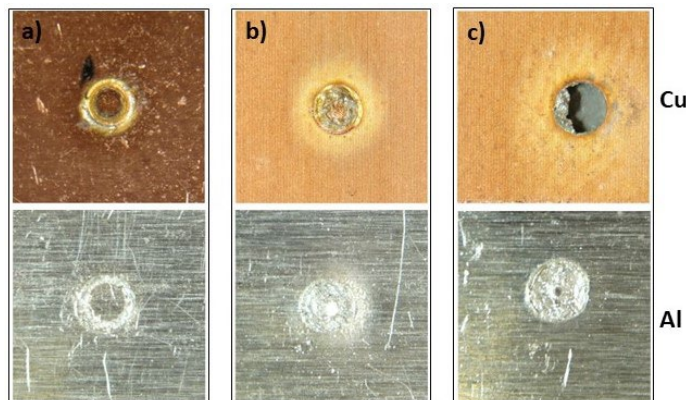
Top view of the fractured samples after the tensile-shear tests, on top Cu, on the bottom, Al, a) mixed of Al failure and lack of weld, b) Al failure, c) mixed of Cu and Al failure.
